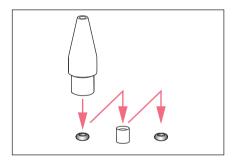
Cross-section of the grip head with correctly inserted o-rings and distancing
